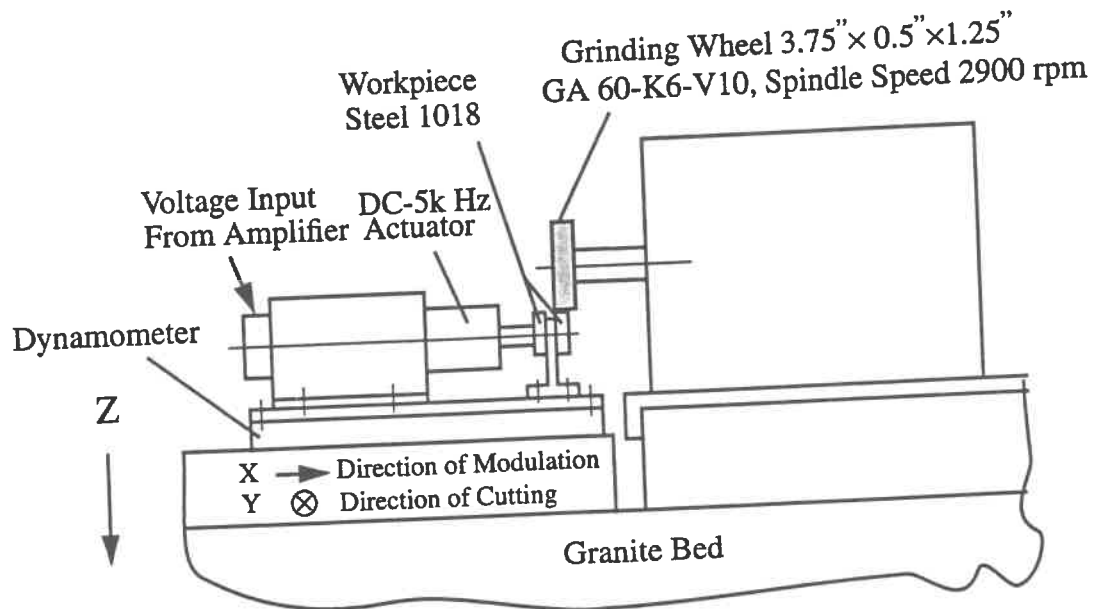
Schematic illustration of surface grinder equipped with actuator and force dynamometer
